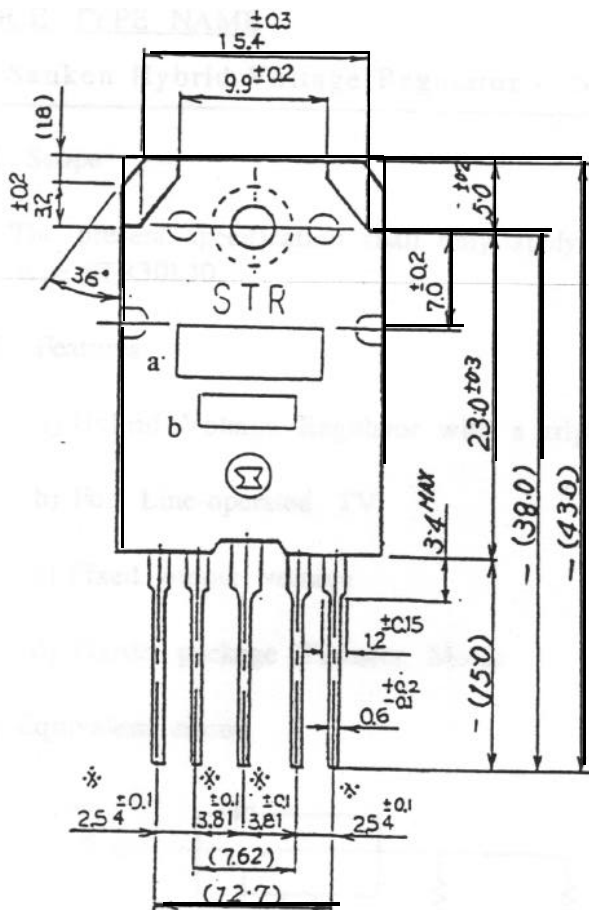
Outline Drawings, Dimensions and Pin Connections
